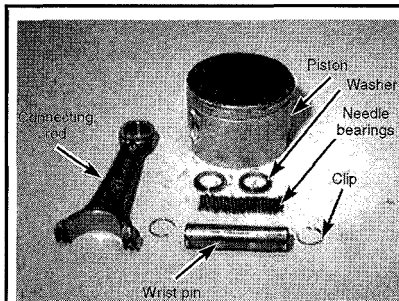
Exploded view of a piston component including the connecting rod, wrist pin and bearing assembly
